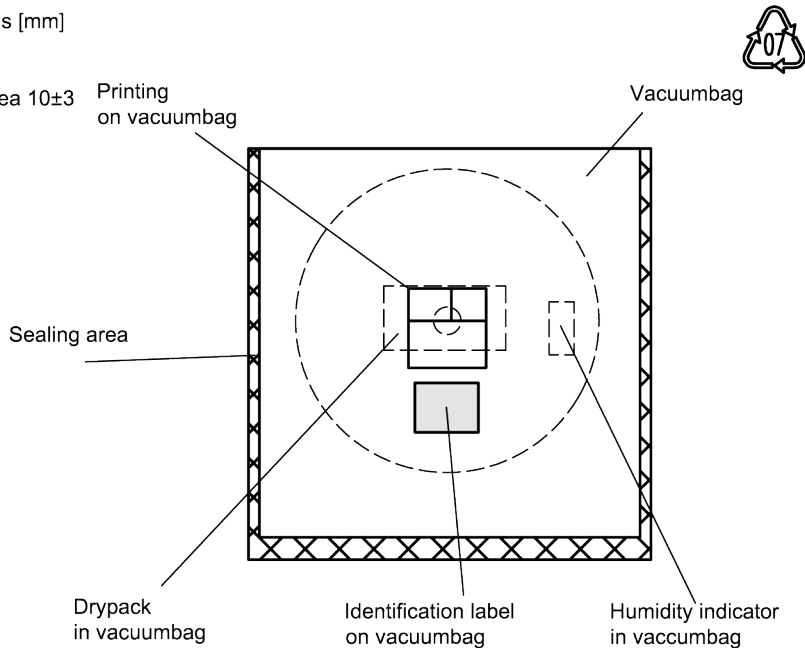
Drawing of moisture barrier bag (MBB) for reel with diameter of 330 mm.
